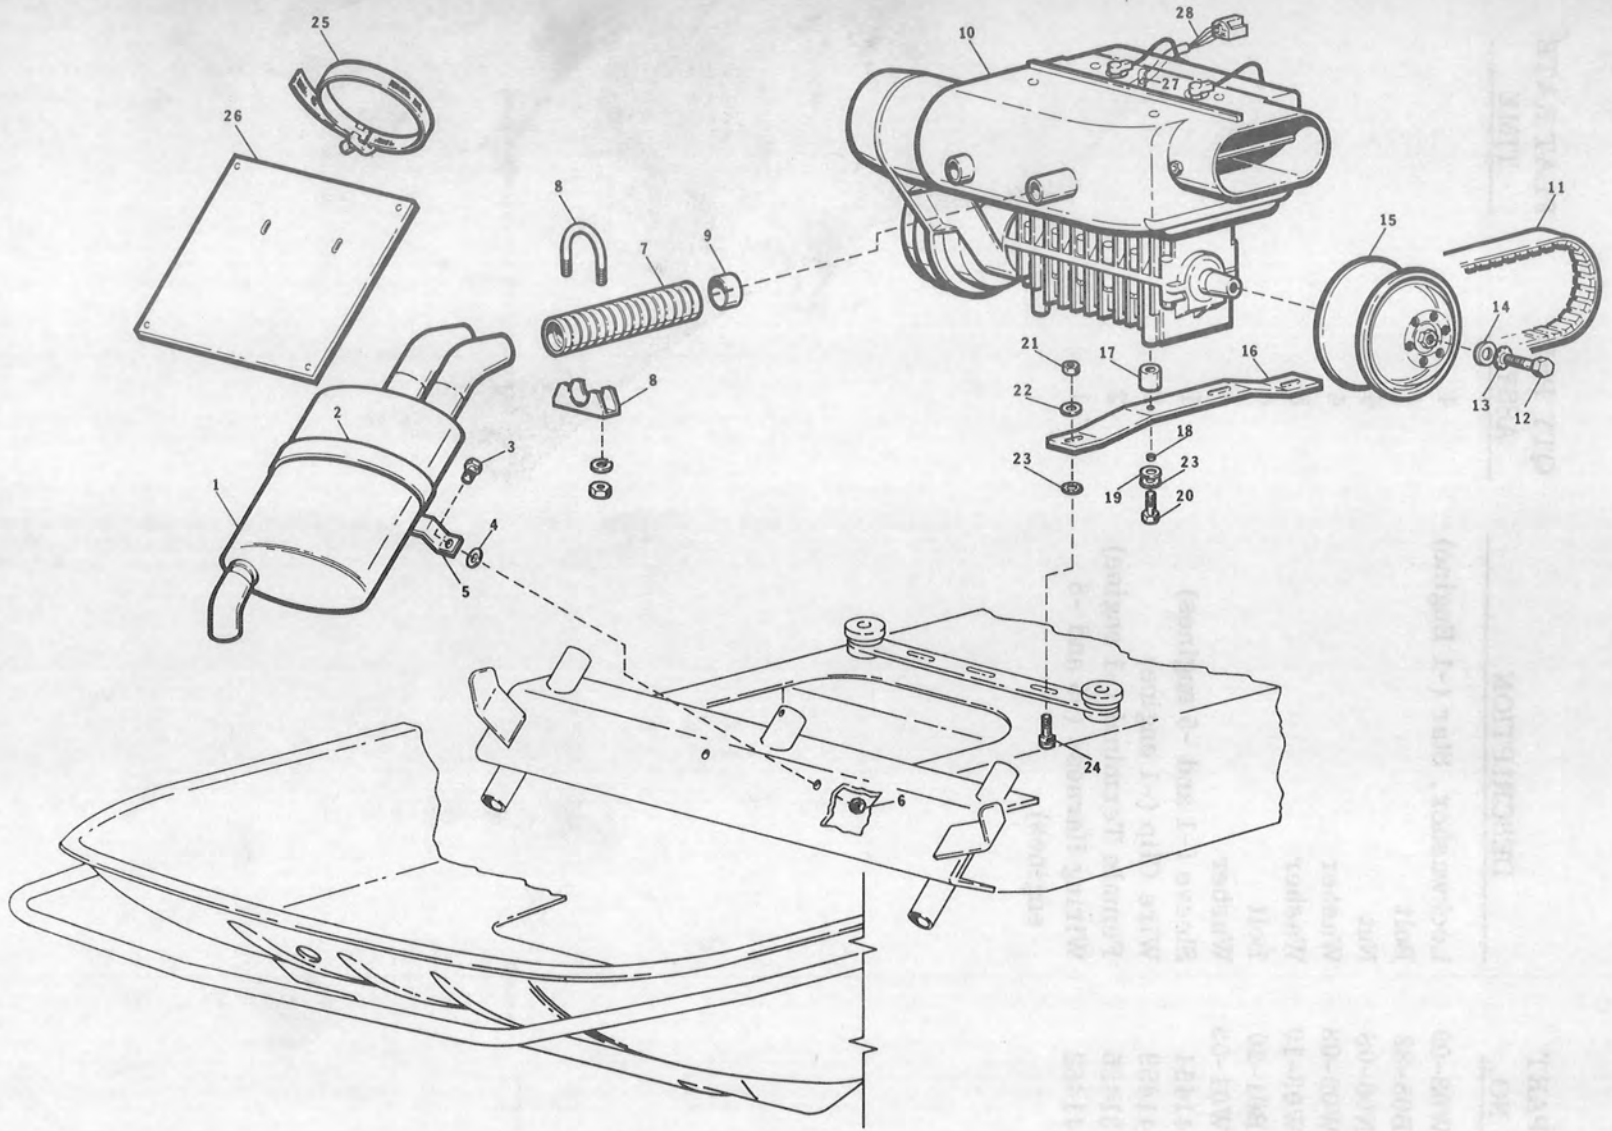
MUFFLER AND ENGINE MOUNTING SACHS
